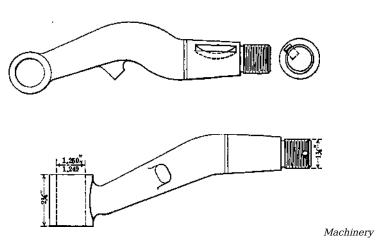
Type of Steering Arm drilled in Jig shown in Fig. $\mathbf{6}$
